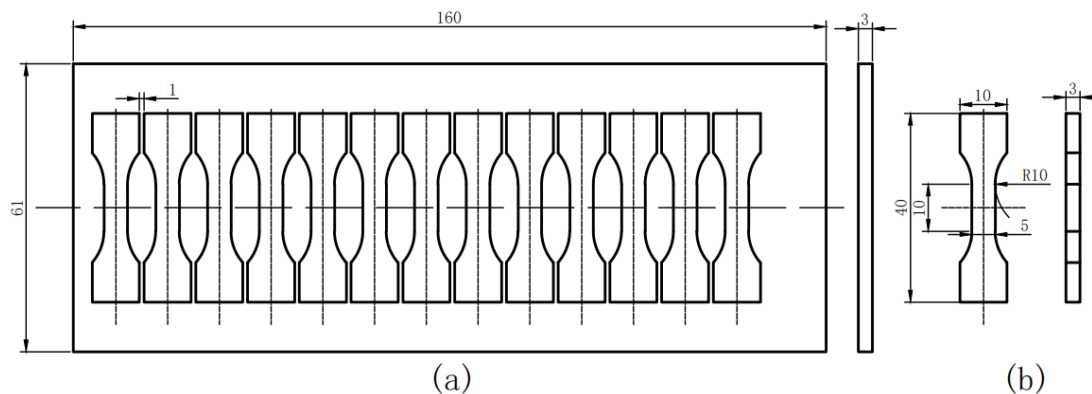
Sample diagram. (a) heat-treated sample; (b) Fatigue test specimens (unit: mm).
